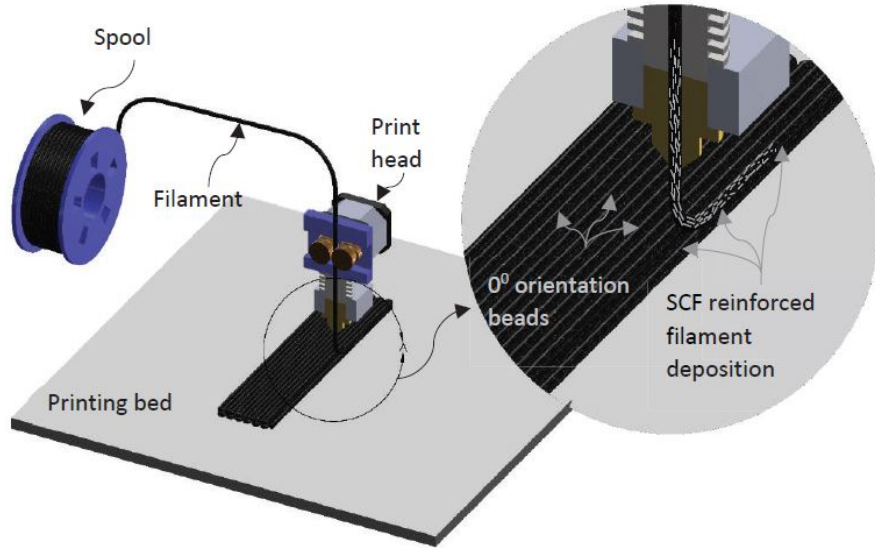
Spool of short fiber reinforced polymer extruded through a heated print head (With permission from Springer Nature <https://www.springer.com/journal/170/> [2].)
